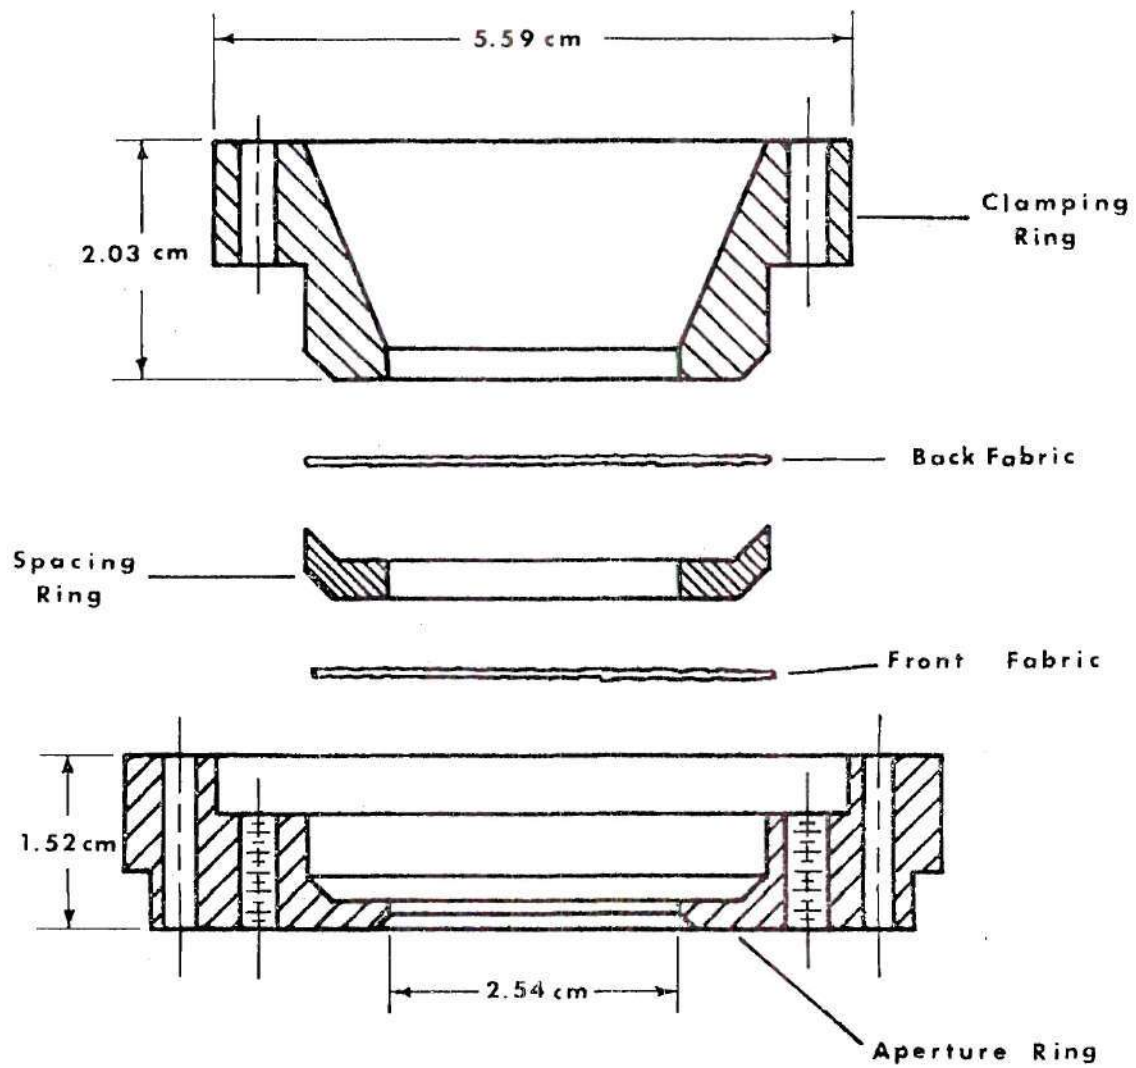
Cross-Sectional View of the Fabric Assembly Holder
